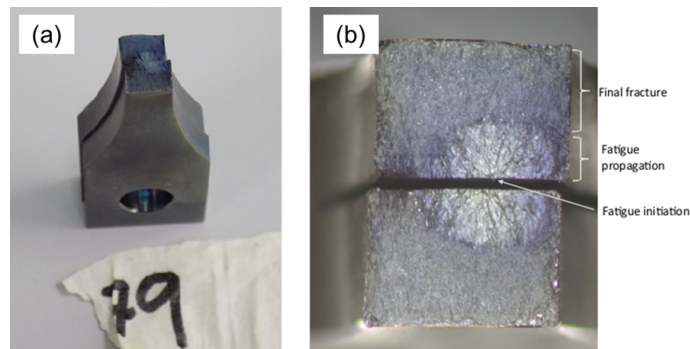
Picture of (a) fractured pristine AM specimen and (b) closeup photograph of fractured surface in 550°C setting
